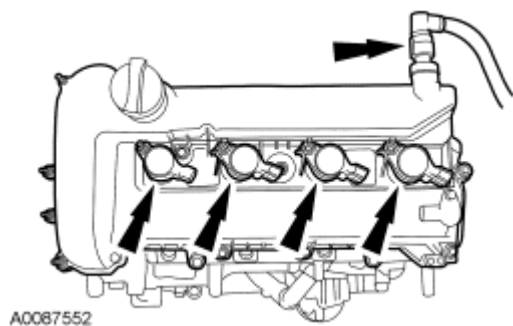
Locating Crankcase Vent Tube And Coil-On-Plugs
